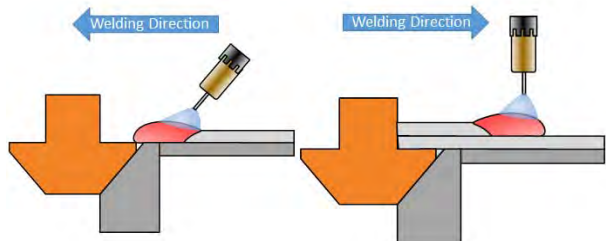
Schematic diagram of the movement of the torch on plate type end-tab in welding process
